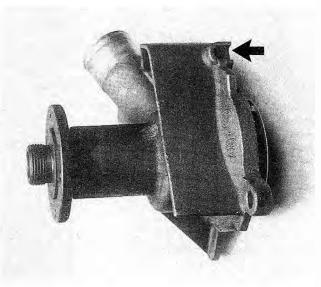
Coolant pump detent (arrow) for camshaft drive belt tensioner spring.
